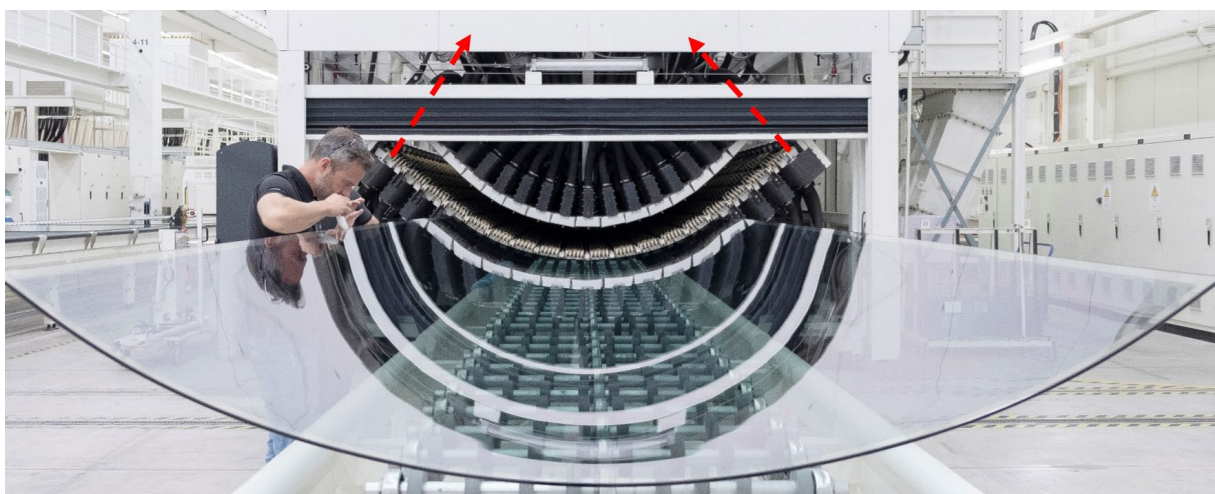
Machine bending (cylindrical) for 18 000 mm length at sedak.
